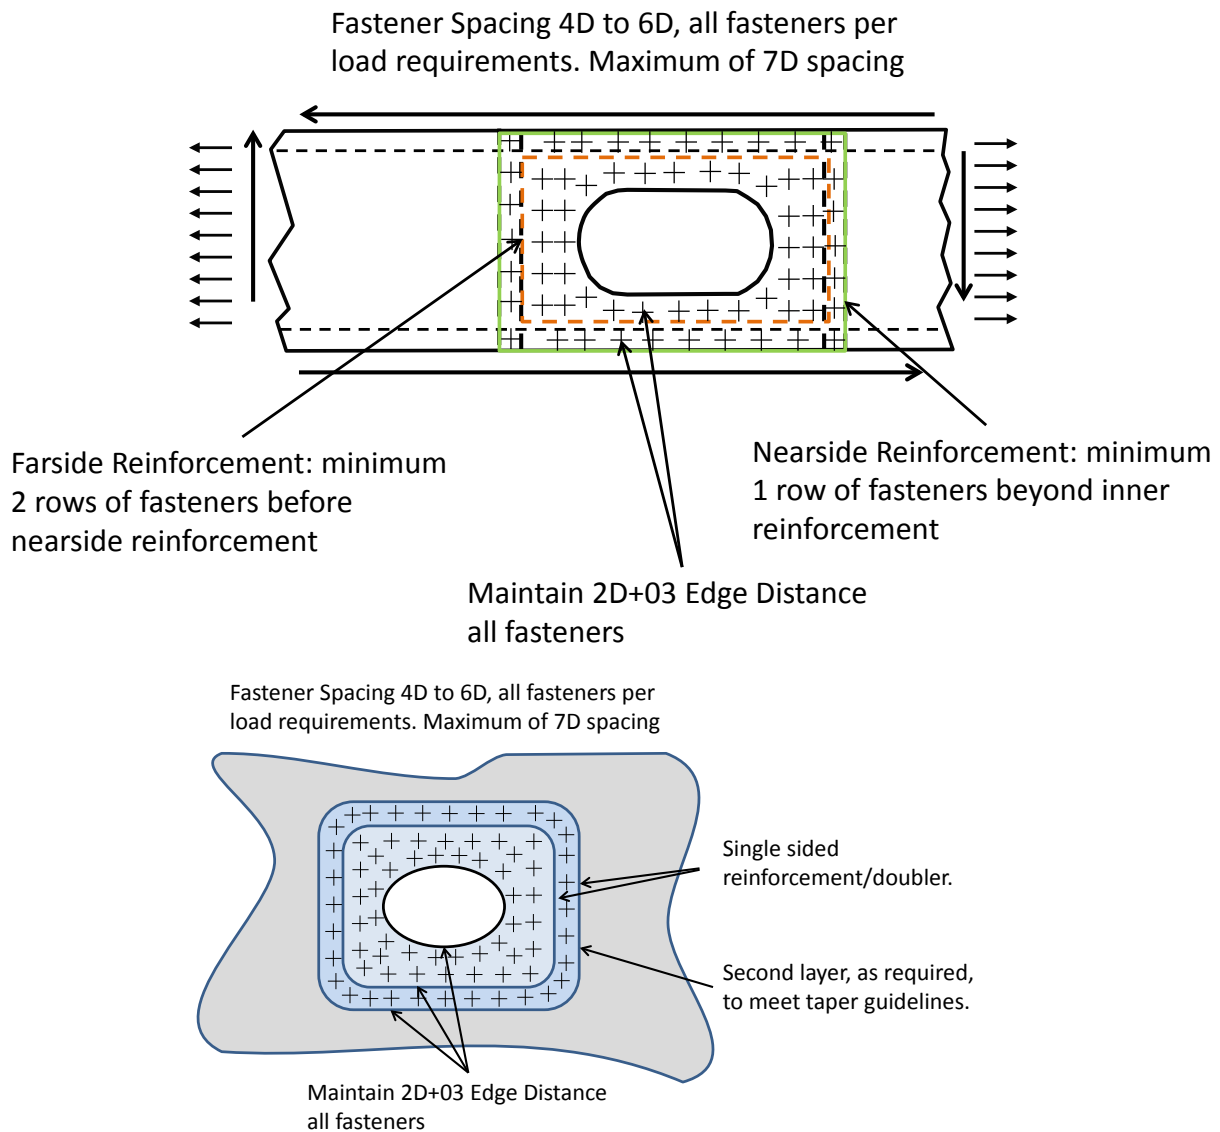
Reinforcement Recommendations for Cutouts
